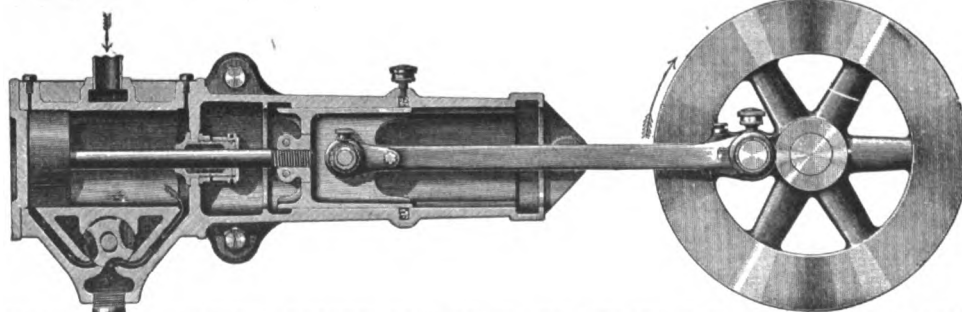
HUNT COAL CRACKER, DRIVEN BY DIRECT CONNECTED STEAM ENGINE, SECTIONAL VIEW.
